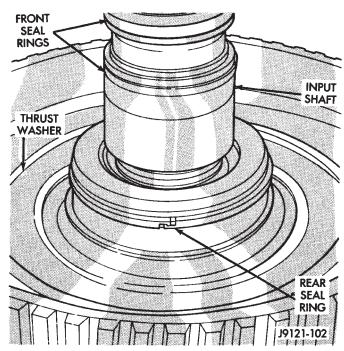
Input Shaft Seal Ring And Thrust Washer Installation—46RH
